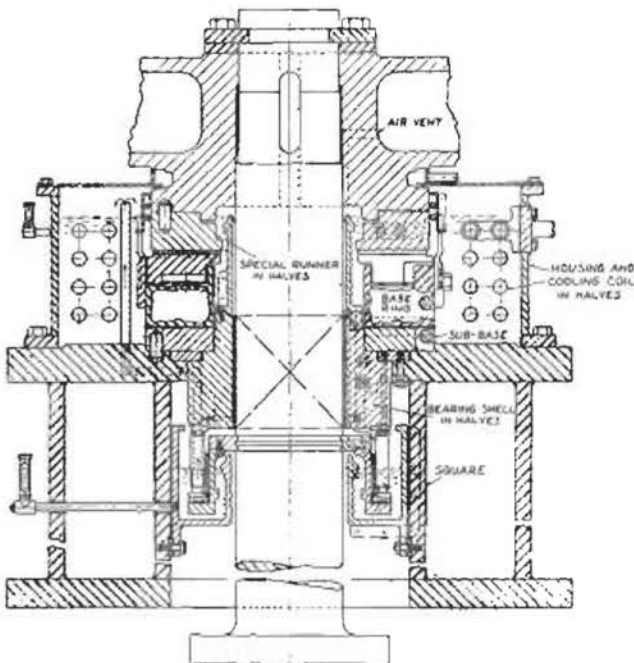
Kingsbury Thrust Bearing with radial bearing underneath. Compound oil reservoir. Oil circulation is automatic by means of viscosity pumping ring. With the oil pan withdrawn, all bearing parts can be lifted out with the shaft.
